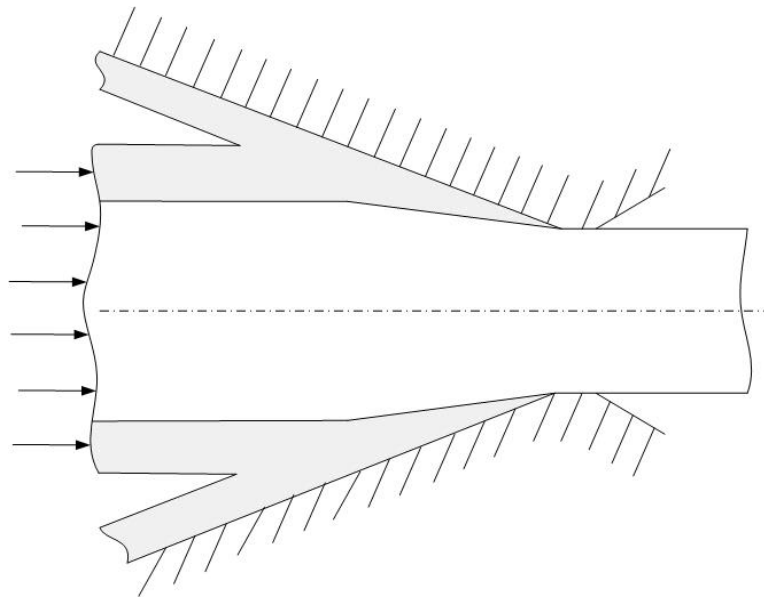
Adhesive failure of polymer coating during composite rod extrusion
